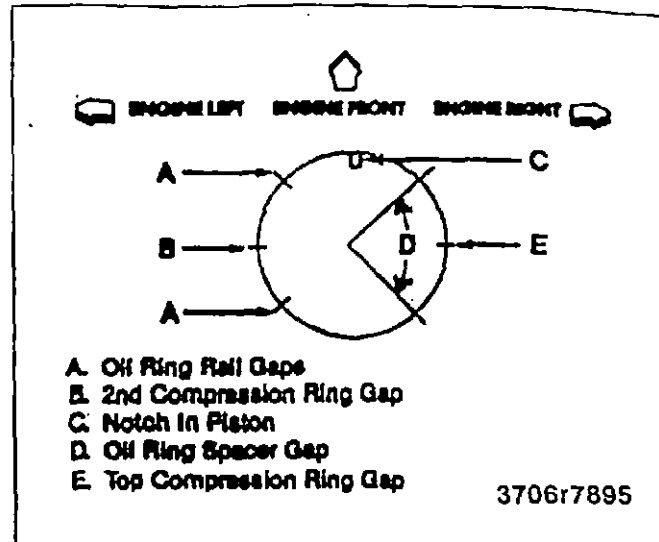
Piston Ring End Gap Location (5.0L and 5.7L Engines)
